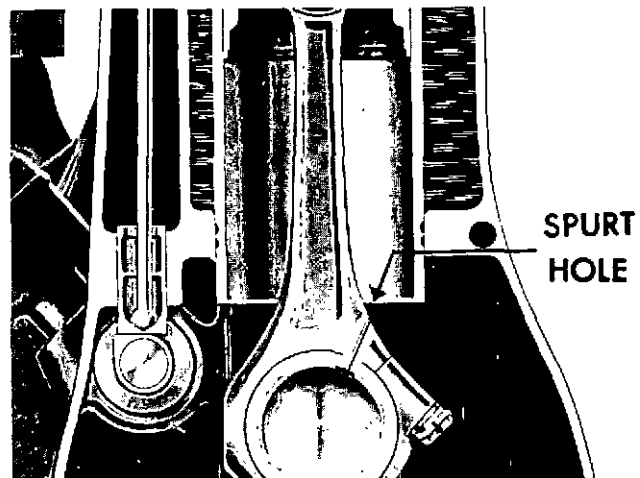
Connecting Rod Spurt Hole (Looking at engine from rear)
